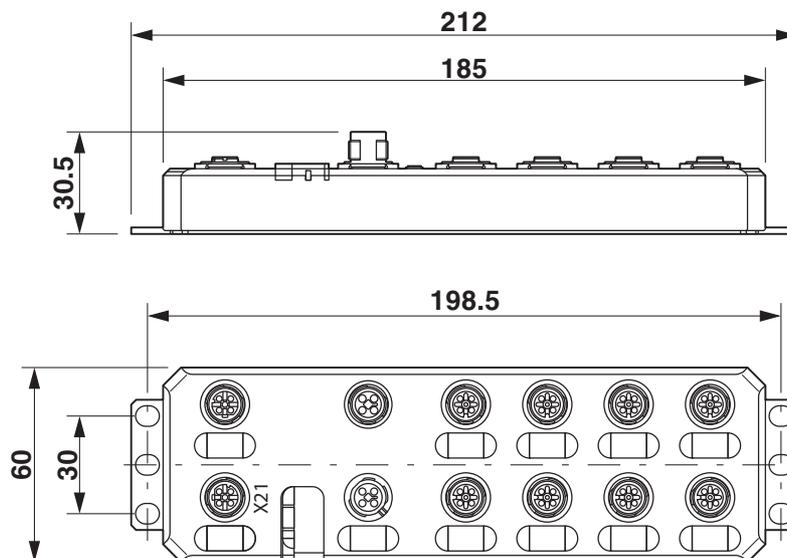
Housing dimensions (mm) of metal devices with extended fixing clips
